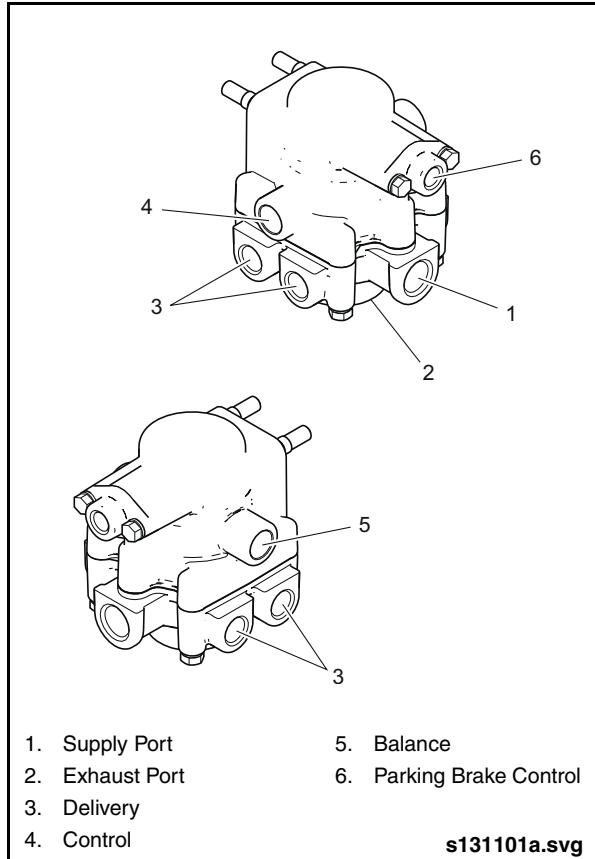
SR-7 Spring Brake Modulating Valve
